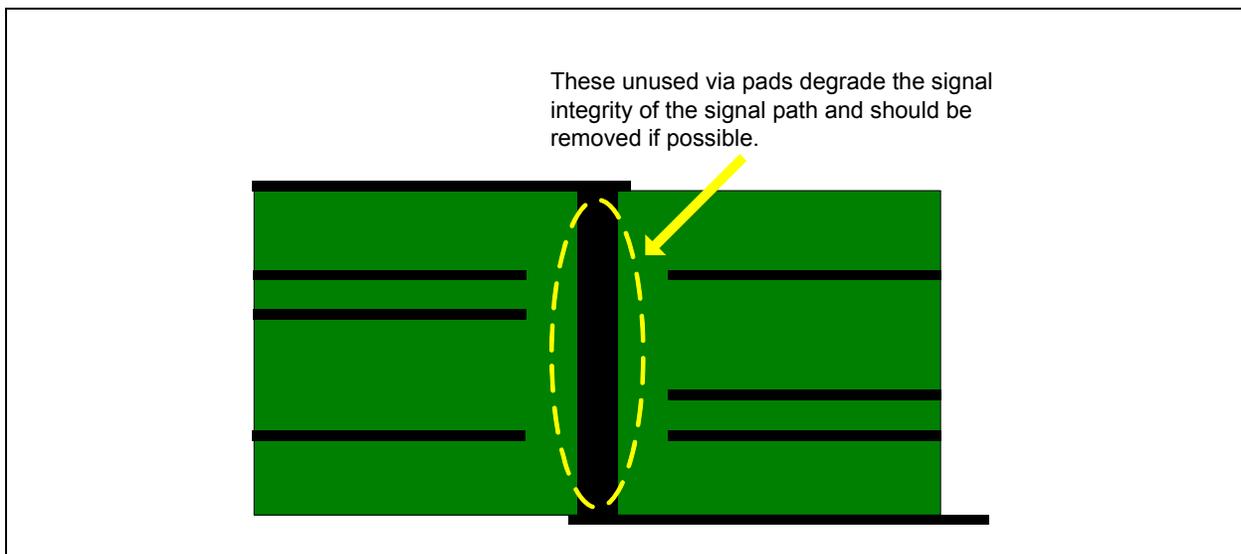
Signal Via Improved by Removing Unused Metal Layer Pads
